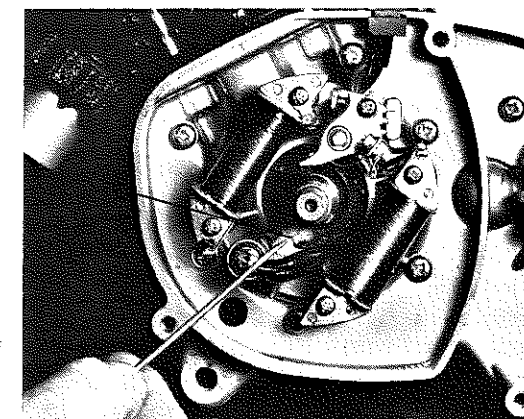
Magneto assembly (less flywheel). Note location of felt lubricating pad (C).
